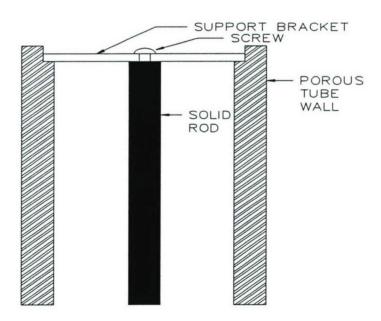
Machined support bracket holds aluminum rod in the center of the filtering tube. A screw in the center of the bracket holds the rod in place. The bracket is a circular disk with holes drilled into it (not shown) for the slurry to flow through. The bracket is slightly larger in diameter than the inside diameter of the filtering tube. A notch is machined into the filtering tube at the top to receive the support bracket.
